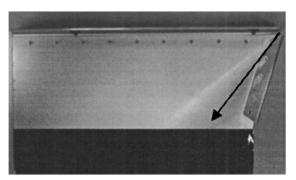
C8 Earth end panel with bracket and rivets removed.
